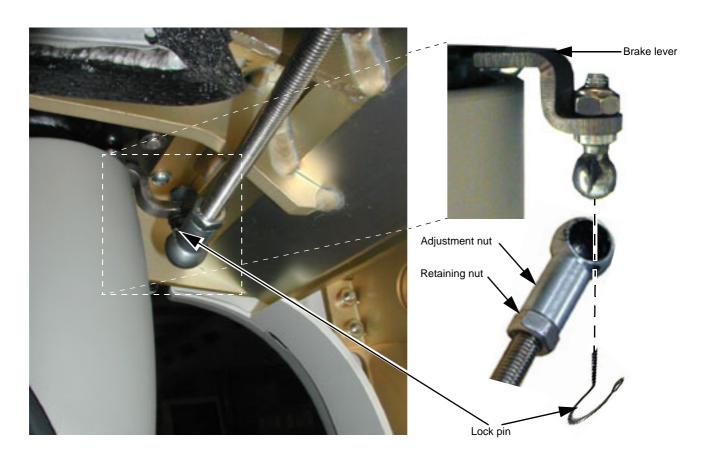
Front Caster Brake Arm and Ball Joint Parts
